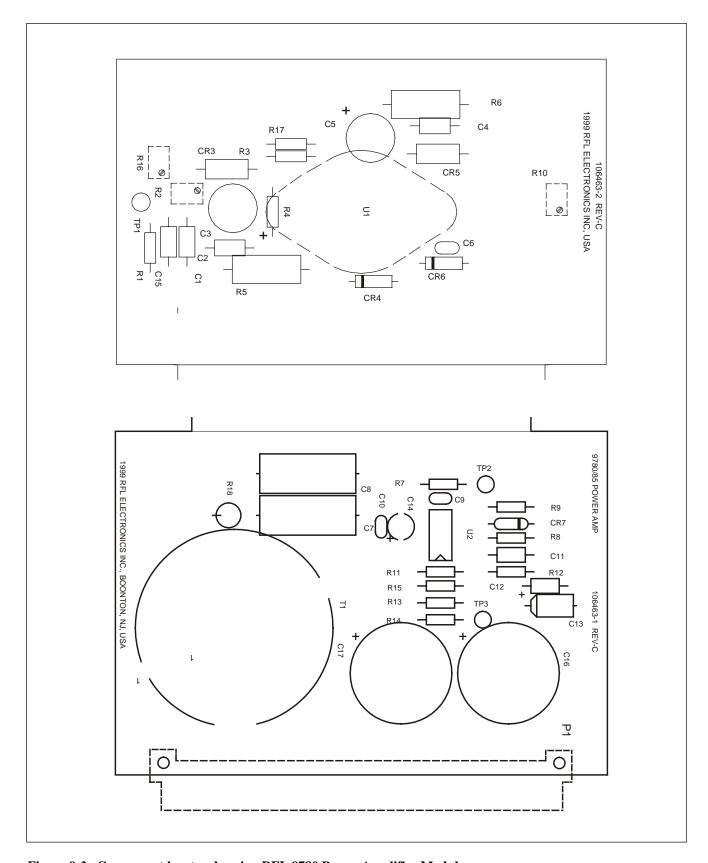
Component locator drawing RFL 9780 Power Amplifier Module
